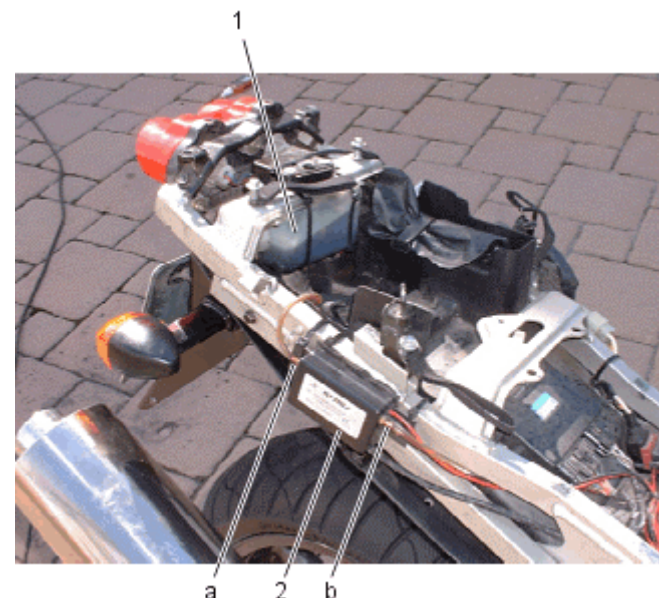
Example of Fixing the Oil Tank and Electronic Control Box
